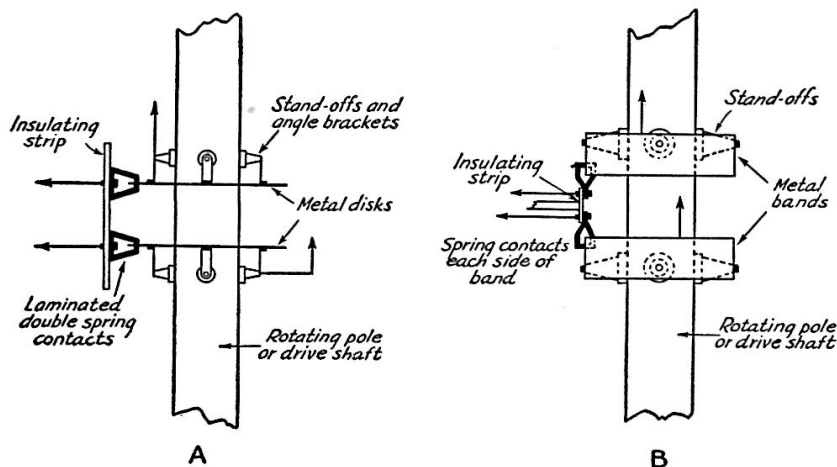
Ideas in sliding contacts for rotatable antenna feeder connection to permit continuous rotation. The broad bearing surfaces take care of any wobble in the rotating mast or driving shaft.
